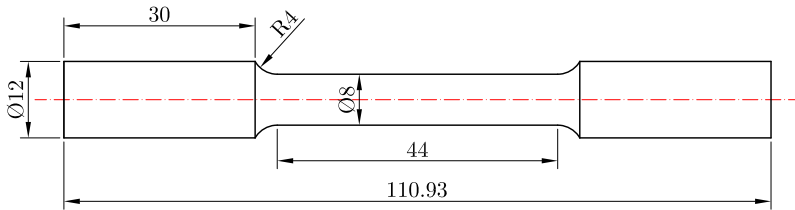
Geometry of AA6063-T5 regular, cylindrical tensile specimens. Dimensions in millimeters.
